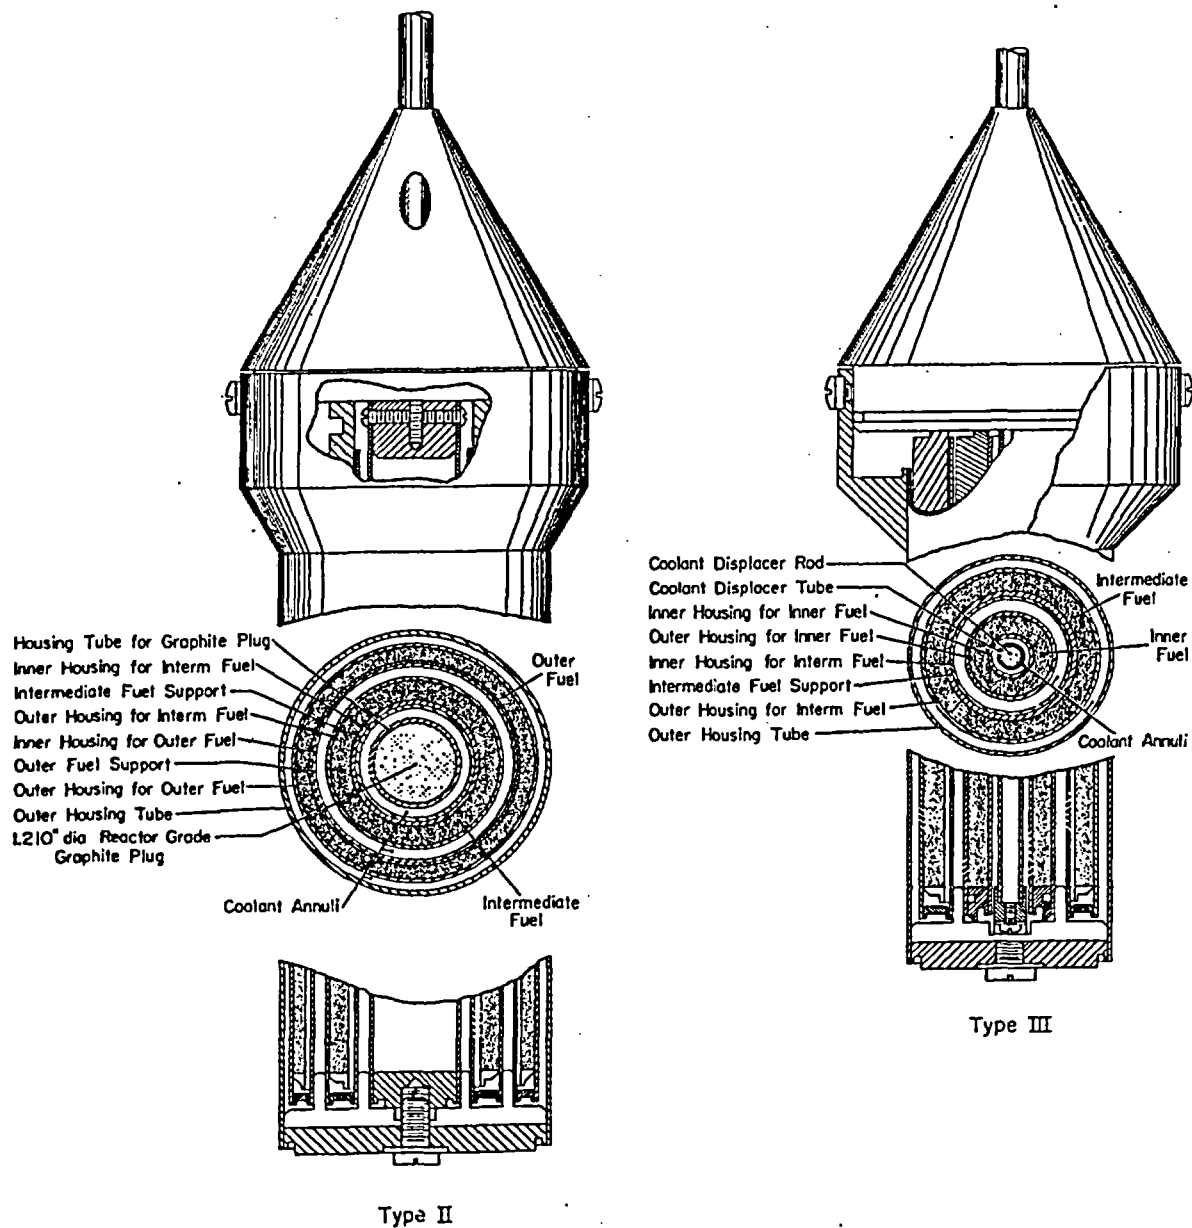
TWO-TUBE  $^{235}\text{U}$ -Th METAL FUEL ASSEMBLIES (Types II and III)
